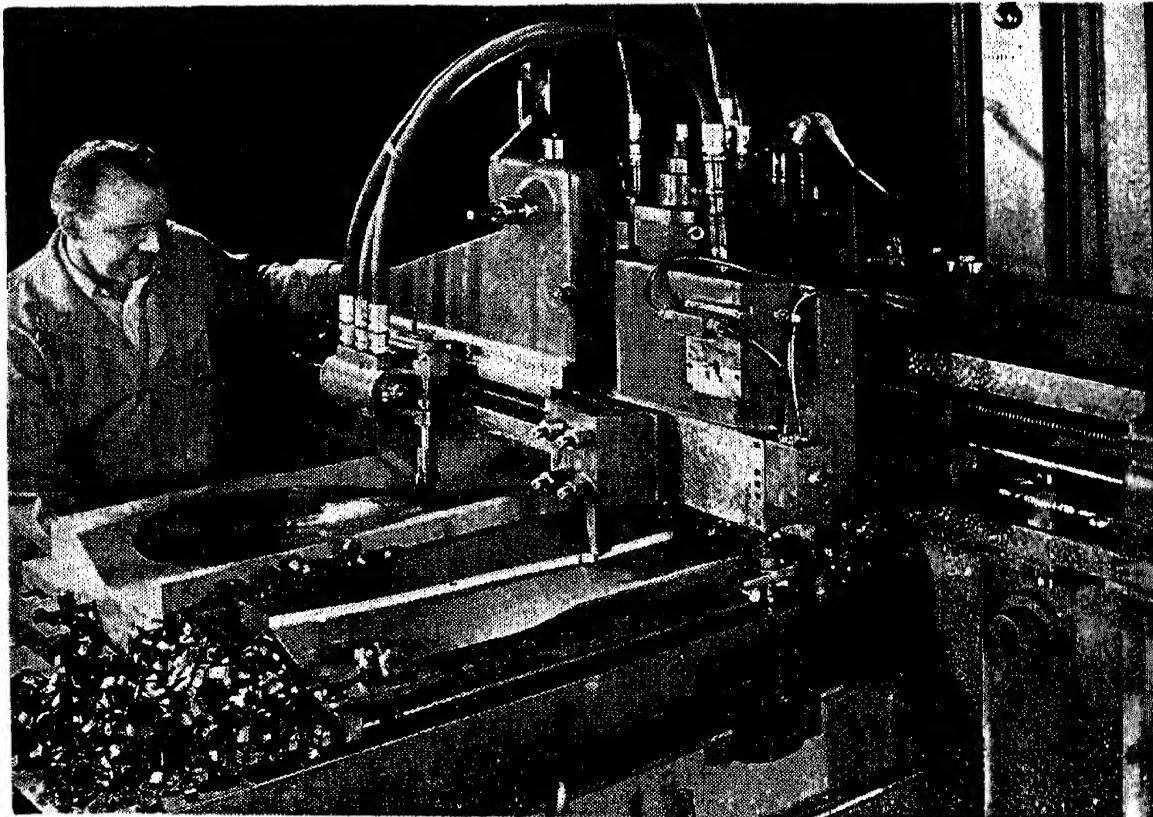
A hydraulic duplicator planing an irregular form.
